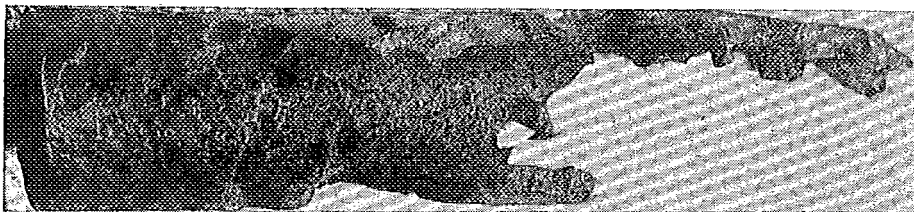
Equalizer Tube from a Gas-lift Valve
